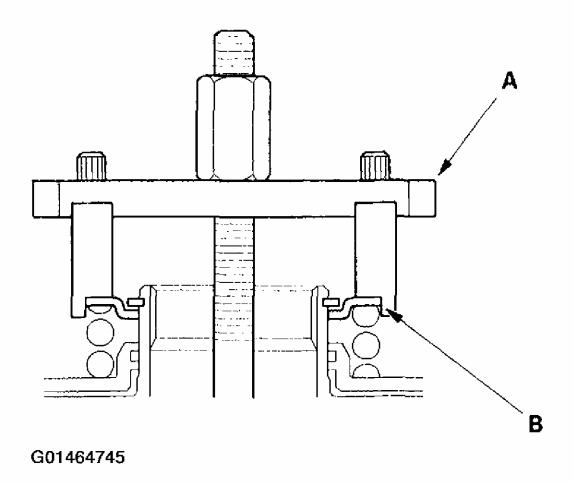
Ensuring The Special Tool Is Adjusted To Have Full Contact With The Spring Retainer On The 1st, 4th & 5th Clutches
